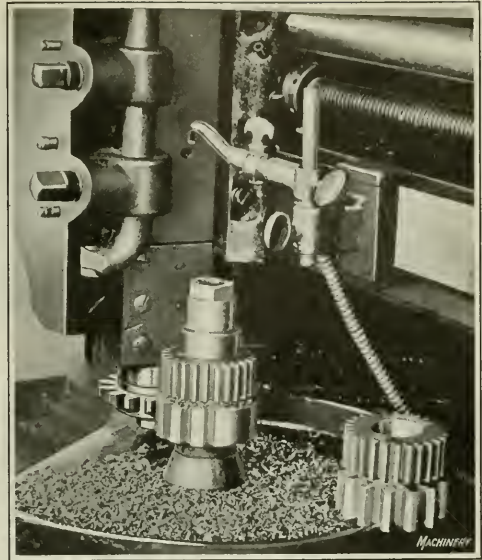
A One-piece Double Gear cut by using the Pull Stroke for the Lower Section and the Push Stroke for the Upper Section
